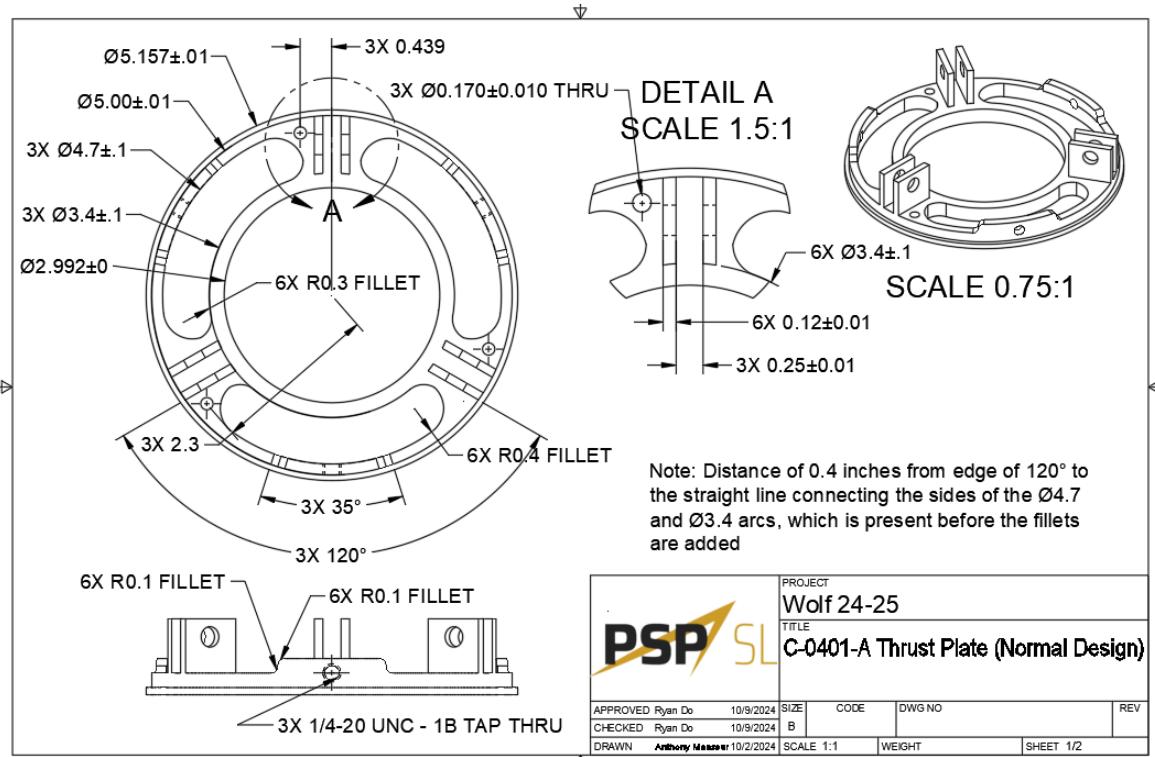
Thrust Plate Technical Drawing (Sheet 1)
